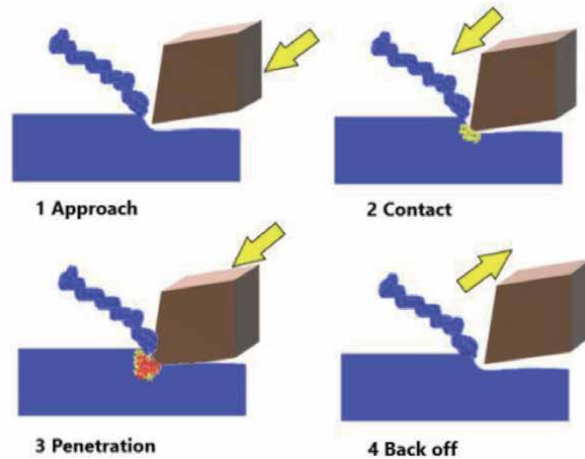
Detailed view of ultra sonic turning process, 1–4 stages of the ultrasonic-assisted machining process.
